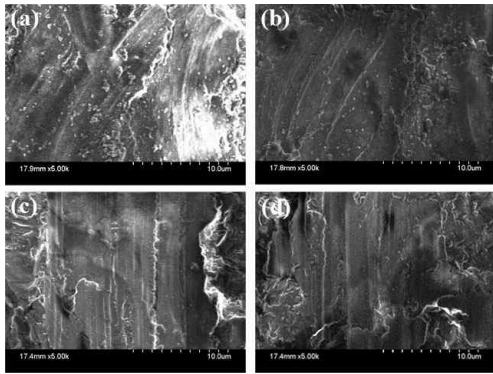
SEM surface images after conventional grinding with (a) 4000rpm, (b) 8000rpm and after ultrasonic grinding with (c) 4000rpm, (d) 8000rpm of rotational speed of spindle
